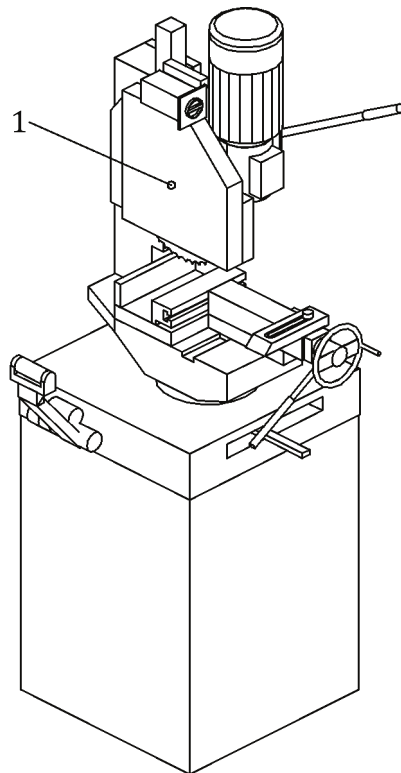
Example for safeguards on circular sawing machine — Large pivoting head type — Semi-automatic
